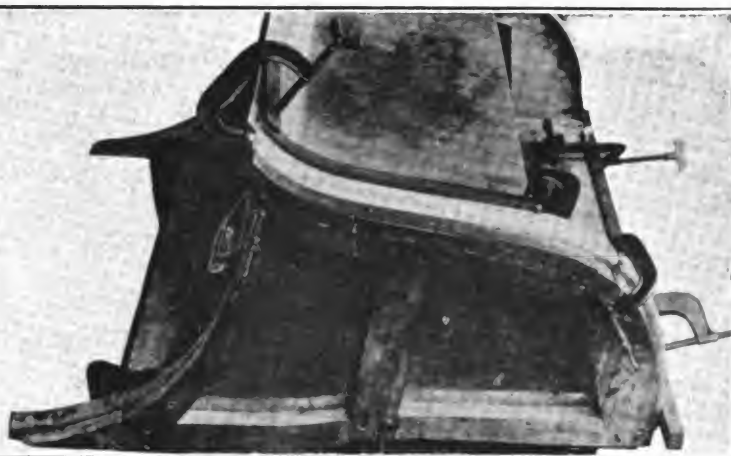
Aluminum sheets of roadster rear boot clamped in position for welding
